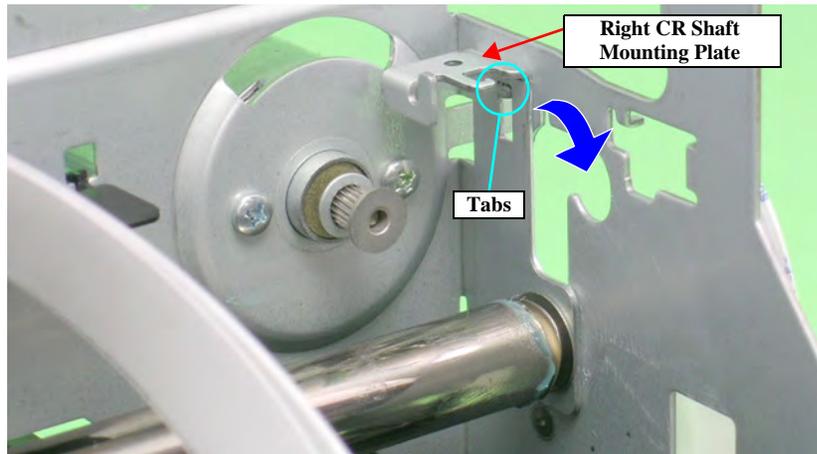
Rotating the Right CR Shaft Mounting Plate
